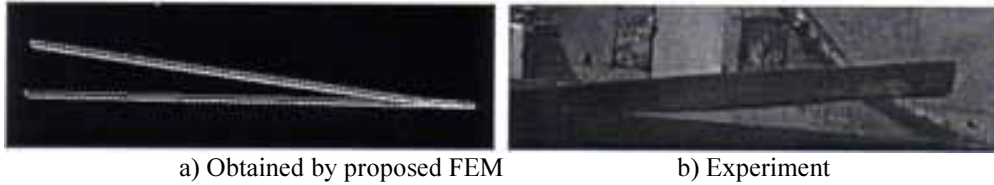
The lateral view of deformed welded line exactly after removing torch
